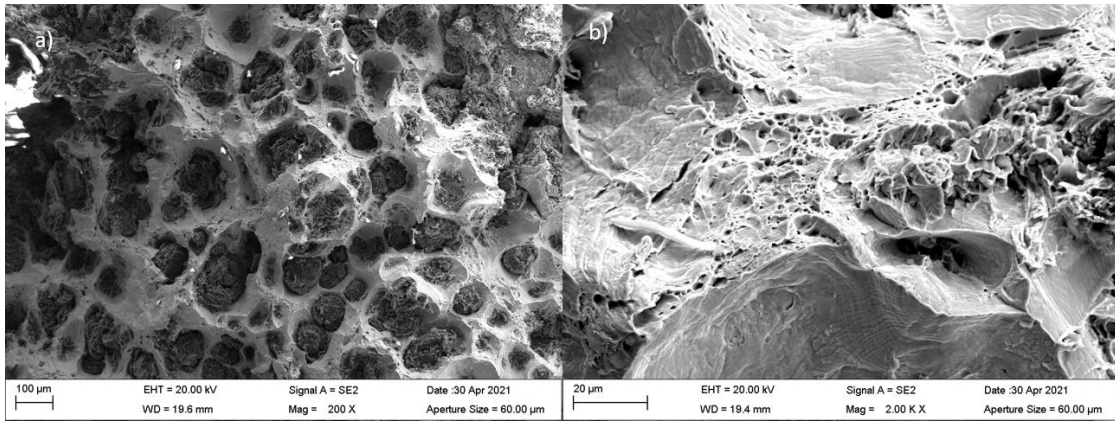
Fracture surface of specimen 22. a) General view of the fracture surface. b) Closeup of at the same position showing dimple pattern in the ferritic ligaments.
